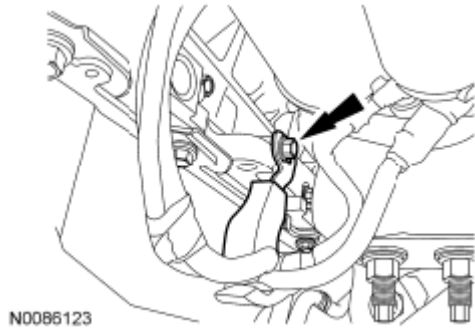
Locating Starter Wiring Harness Rear Support Bracket Bolt
